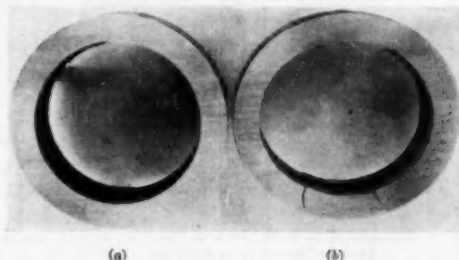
CROSS SECTIONS OF DEFECTIVE 2-IN.-OD TUBE (a, Showing pronounced curvature of seams. b, Appearance after a slight amount of deformation.)
